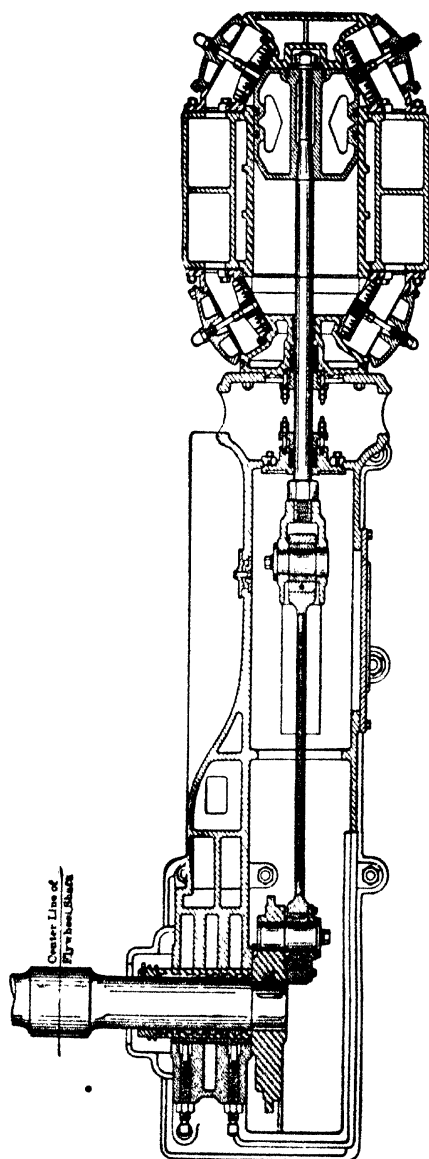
Ingersoll-Rand Duplex, Two-Stage, Belt-Drives Compressor, with Plate Valves. (High-pressure side shown.)
